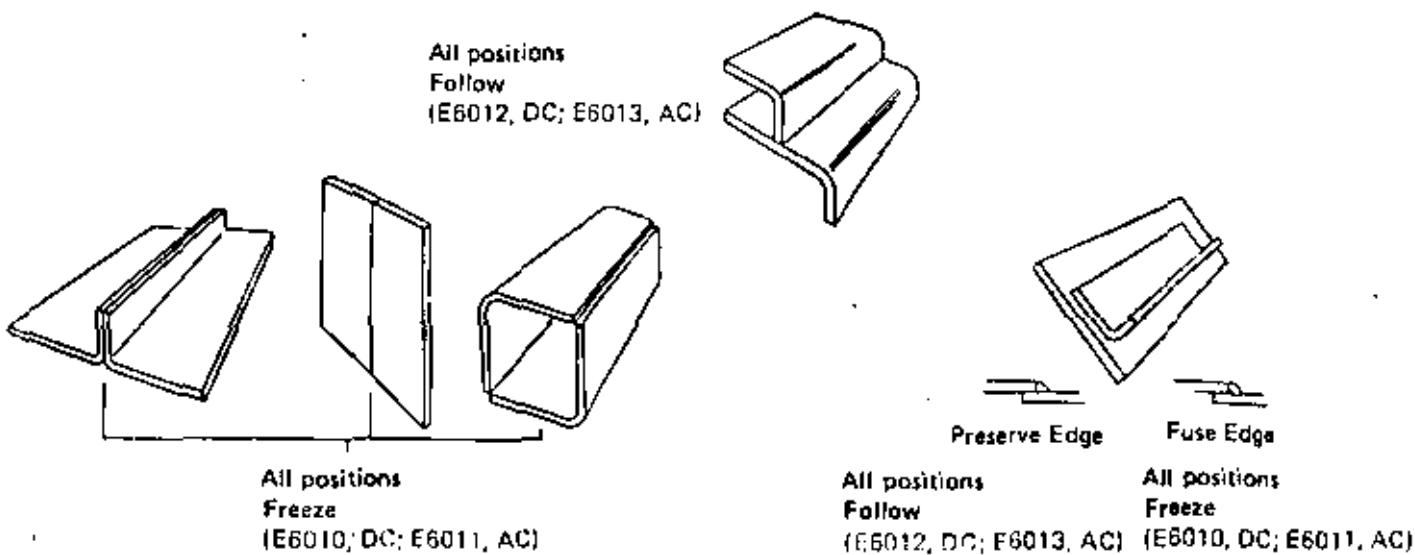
Guide to selection of electrodes for sheet-metal welds.
